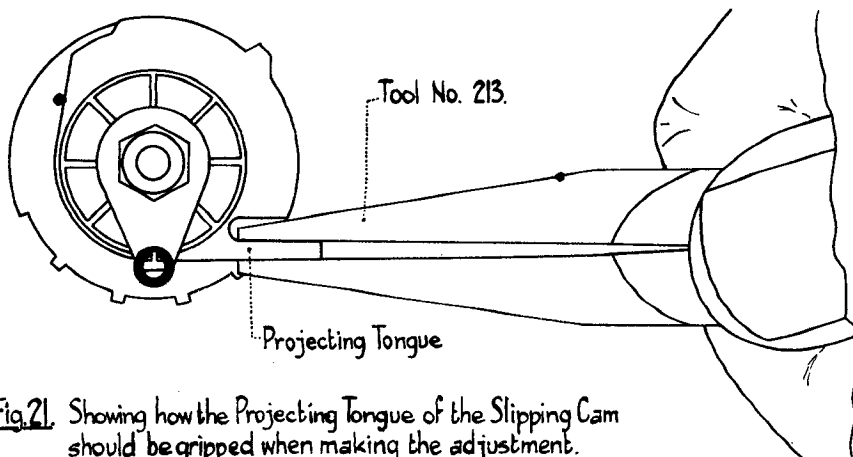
Showing how the Projecting Tongue of the Slipping Cam should be gripped when making the adjustment.
